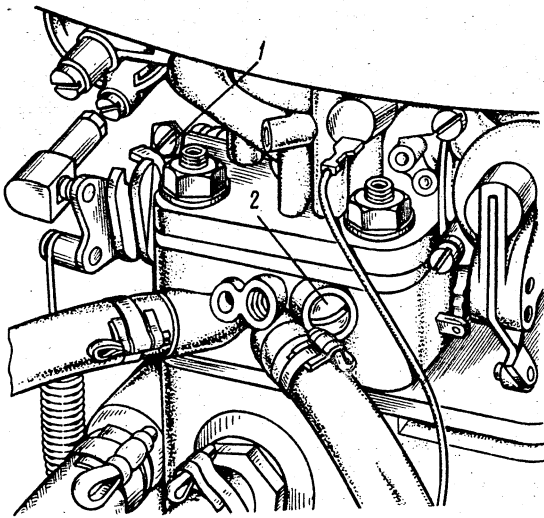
Idling System Adjusting Screws in Carburetors 2106-1107010:
